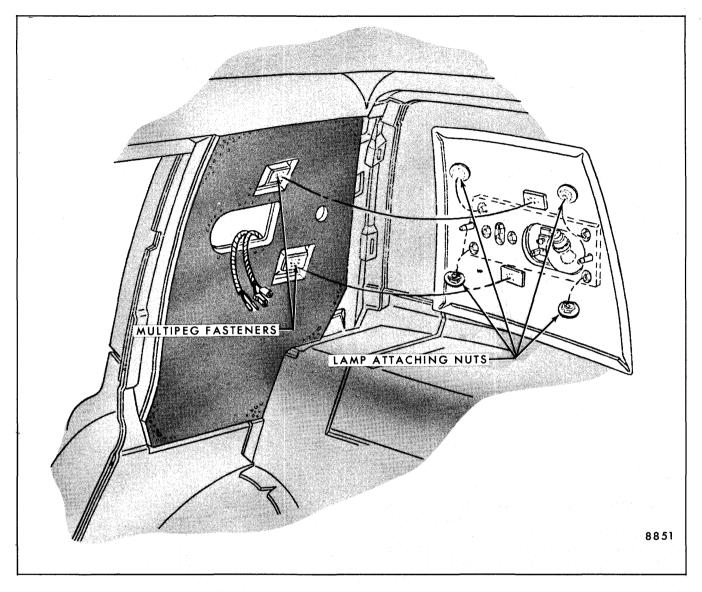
Quarter Upper Trim and Lamp Assembly
